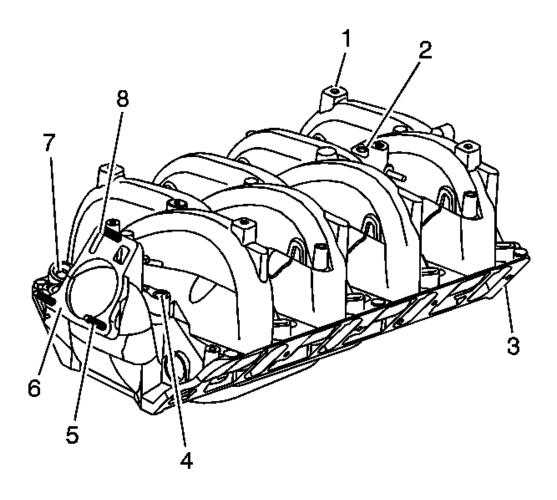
View Of Intake Manifold & Components Courtesy of GENERAL MOTORS CORP.
